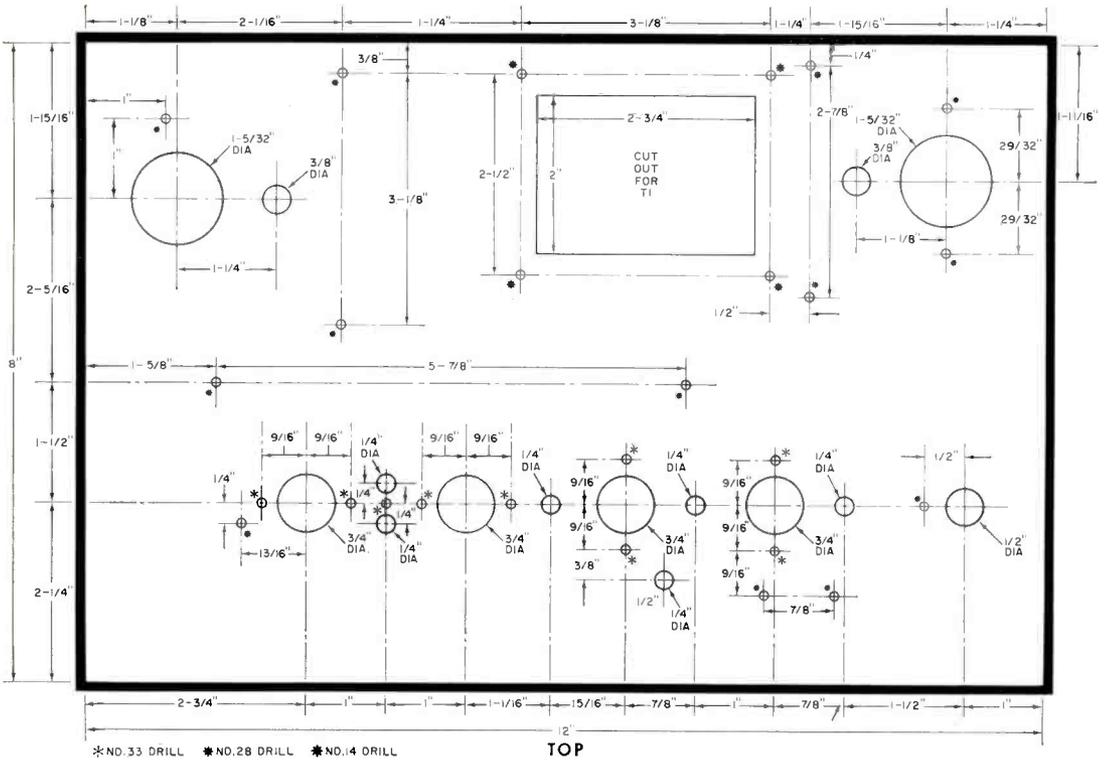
Diagram shows cutouts, mounting holes in top of chassis. At front, from left to right, are V4, V1, V2, V3. Large hole at top left is for mounting V5; opposite are cutouts for T1 and for capacitor C25.
